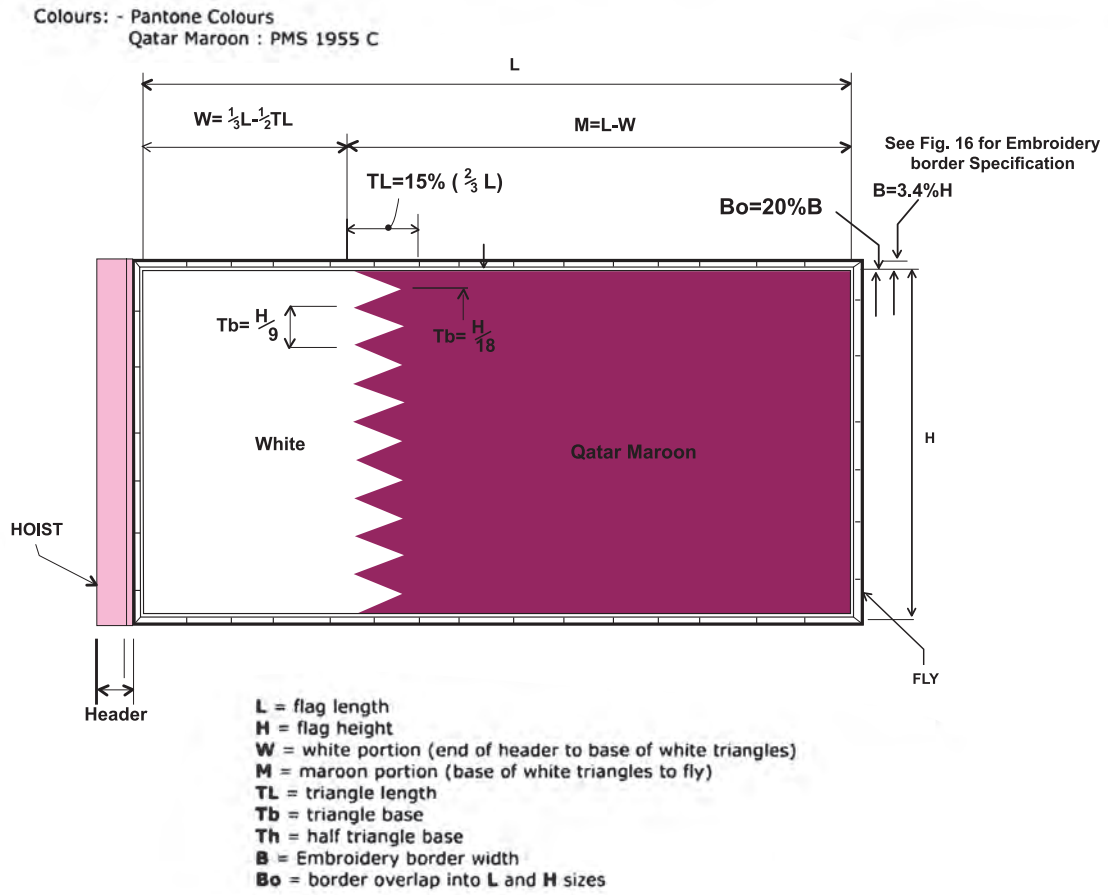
Indoor Flag - Two-piece Applique Flag - Construction Details
